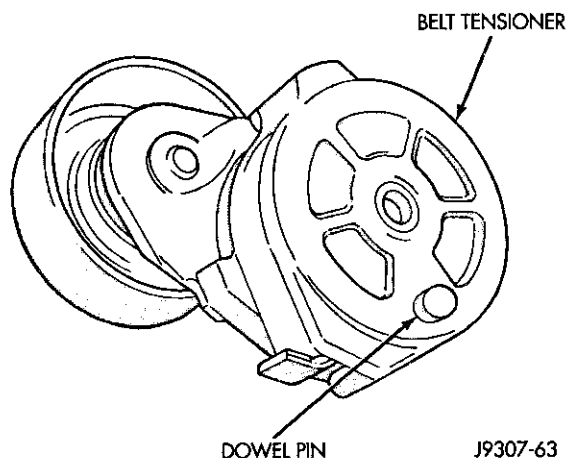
Tensioner Dowel Pin—5.9L HDC-Gas and 8.0L V-10 Engines
